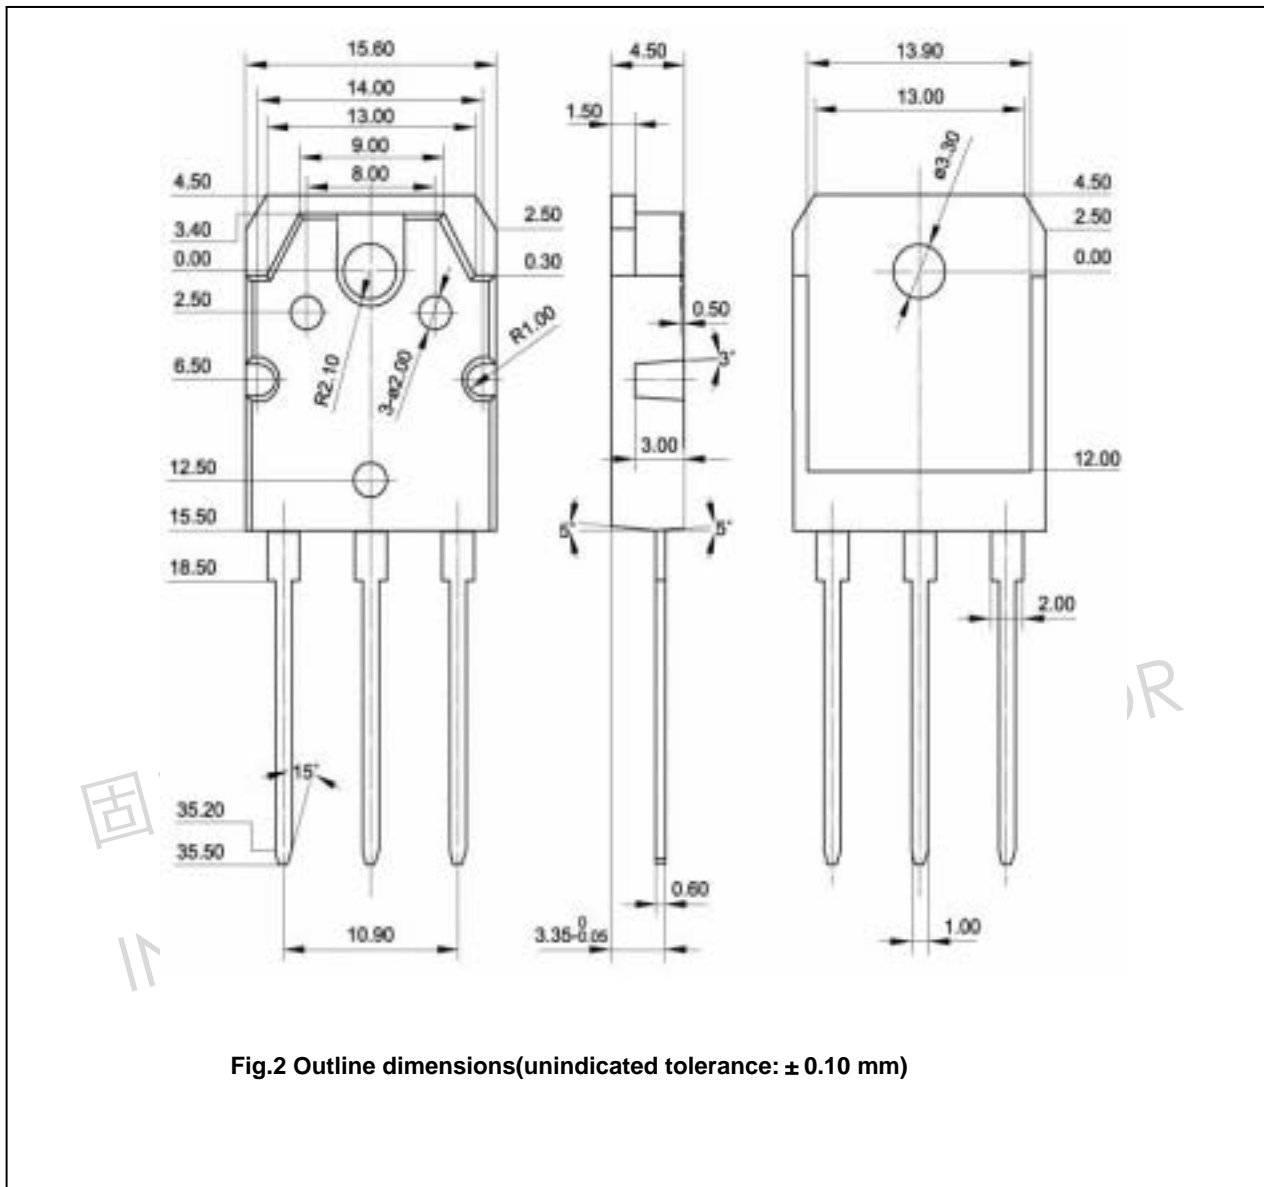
Outline dimensions(unindicated tolerance:  $\pm 0.10$  mm)
